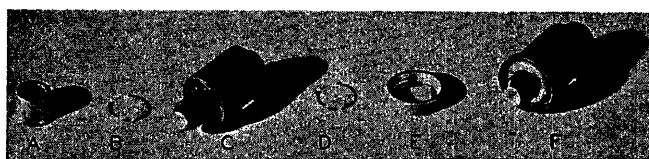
Component parts of a metal-glass-porcelain terminal seal and a completed terminal
